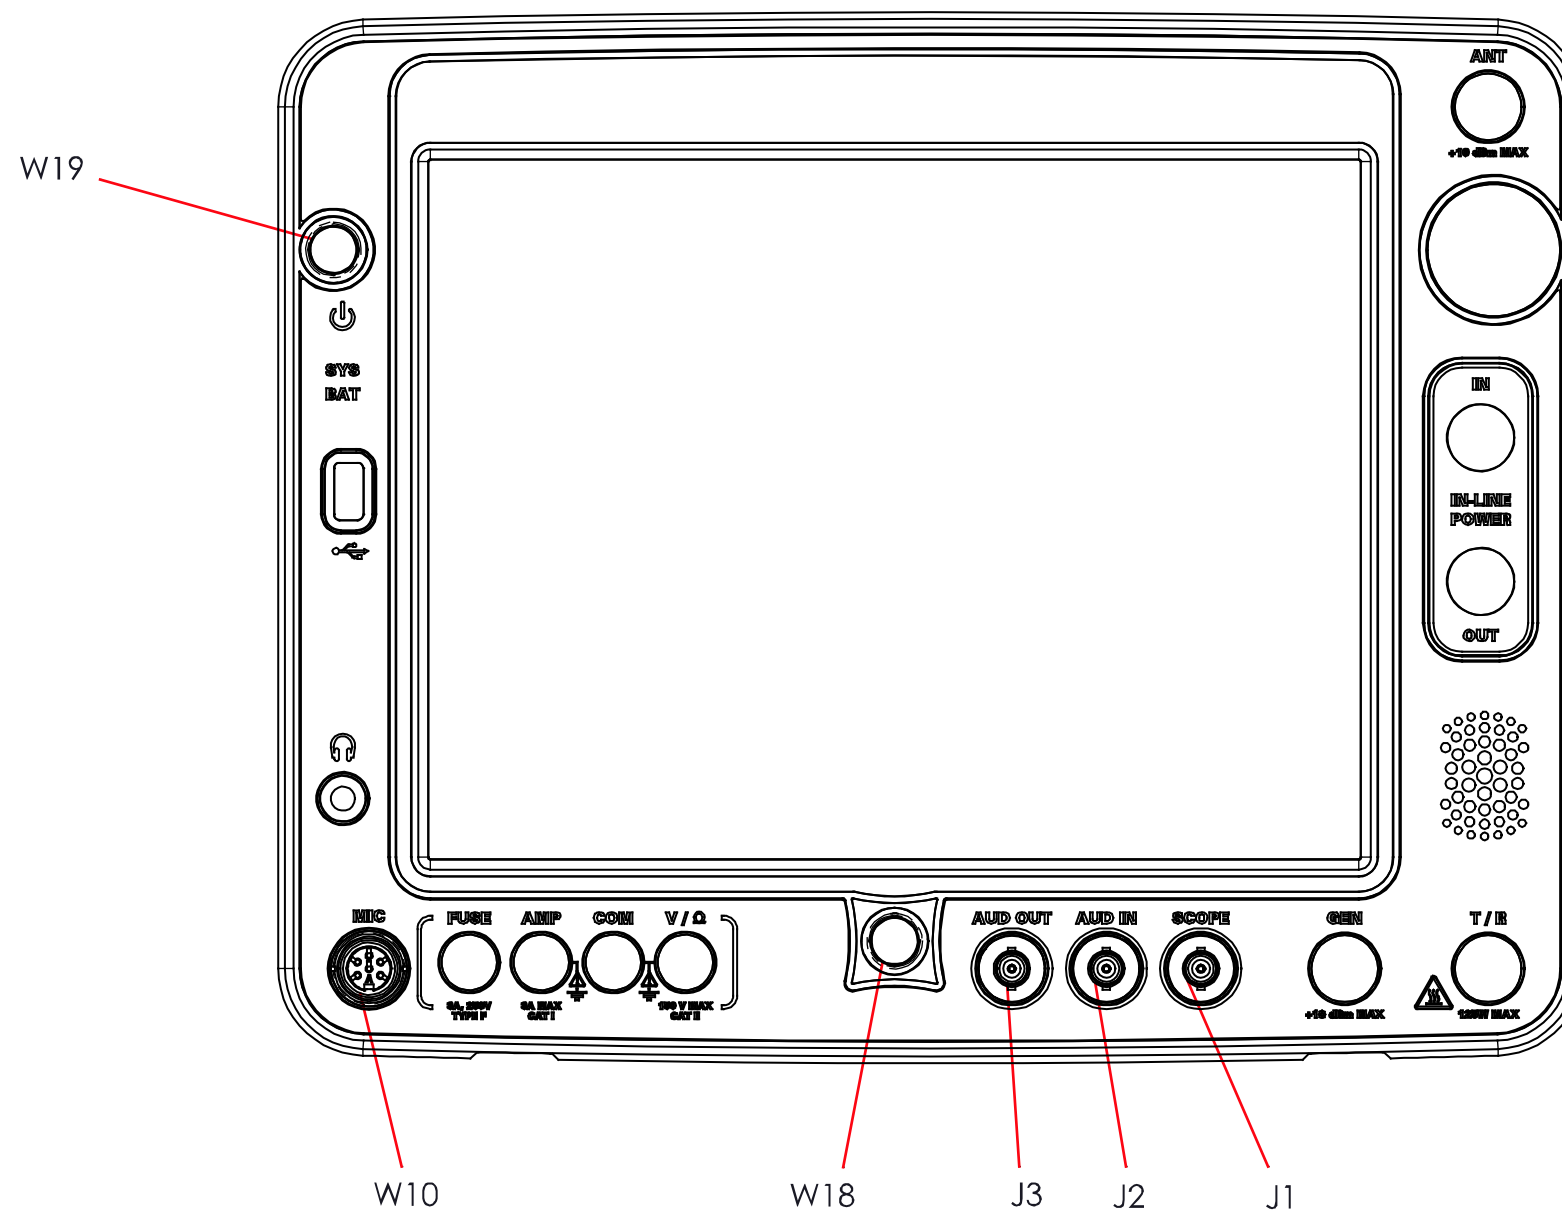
Front Chassis / Panel Assy (Sheet 1 of 6)
